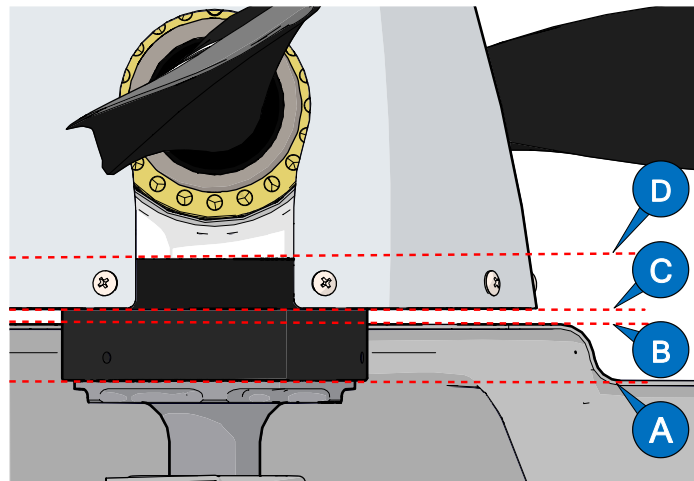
Key dimensions for calculating required mount kit size (spacer kit shown).
